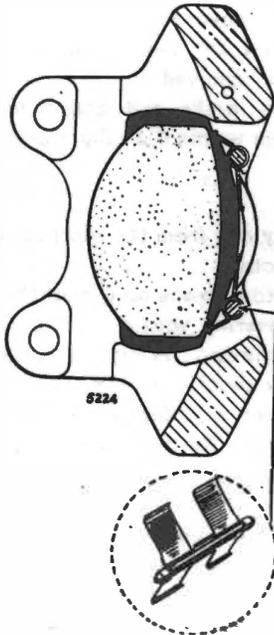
Section through caliper (early type of brake pad and retaining pin shown)
